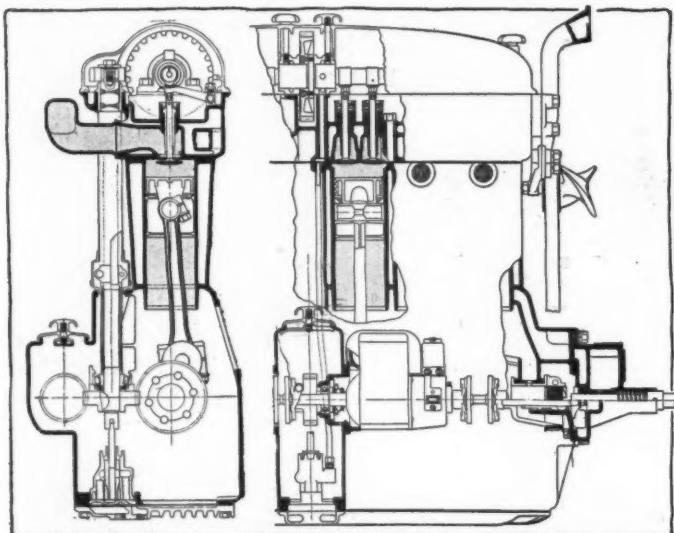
Part sections through Premier Weideley motor, showing construction of detachable cylinder head
